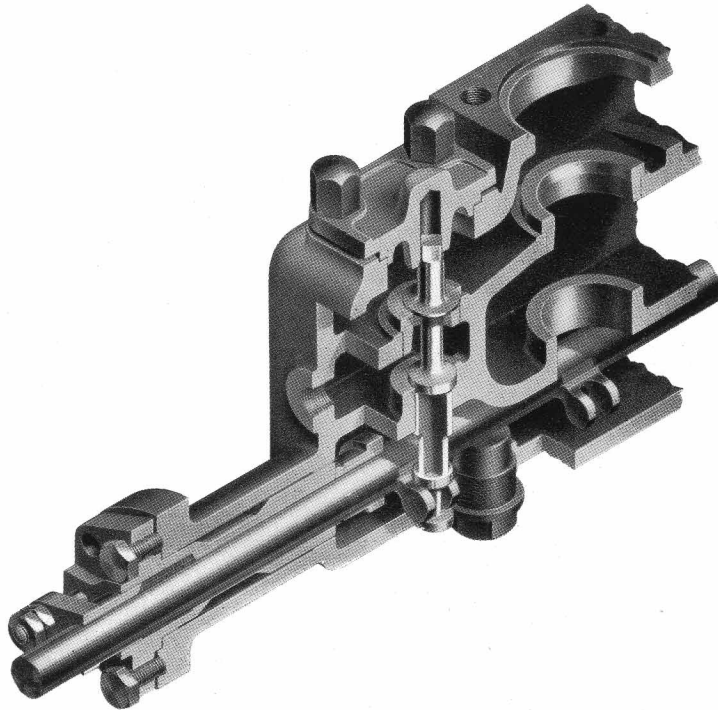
Sectional view of the Automatic Drifting Arrangement.
